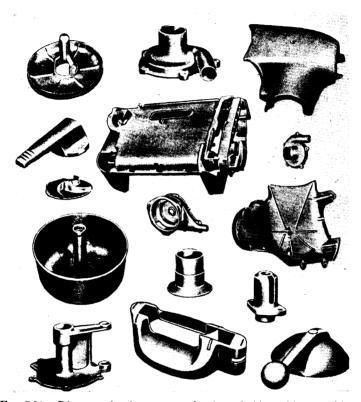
Die-cast aluminum parts for household washing machines.
